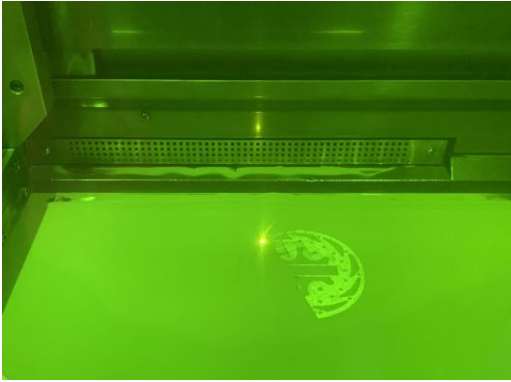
Printing in Prima Additive Printsharp250 machine (Source: Author's own).
